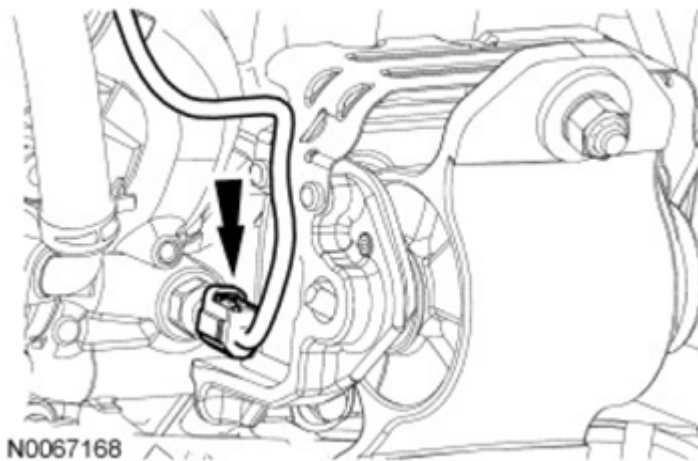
Locating Engine Oil Pressure Switch Electrical Connector
